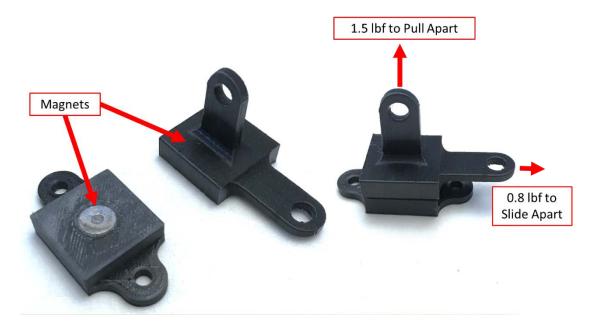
Magnet test setup used to test the amount of force required to separate two disc magnets. It was found that 1.5 lbf is required to pull the magnet faces directly apart, and 0.8 lbf to slide them apart. This was determined by using a force gauge to pull the two pieces of the test apparatus apart.
